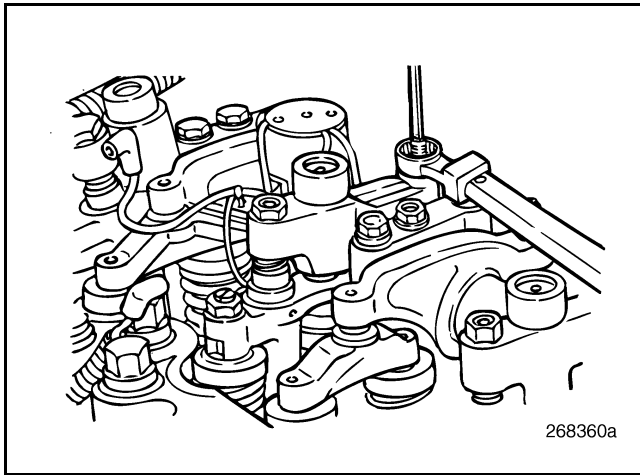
Loosening Hydraulic Actuator Locknut and Backing Out Adjusting Screw
